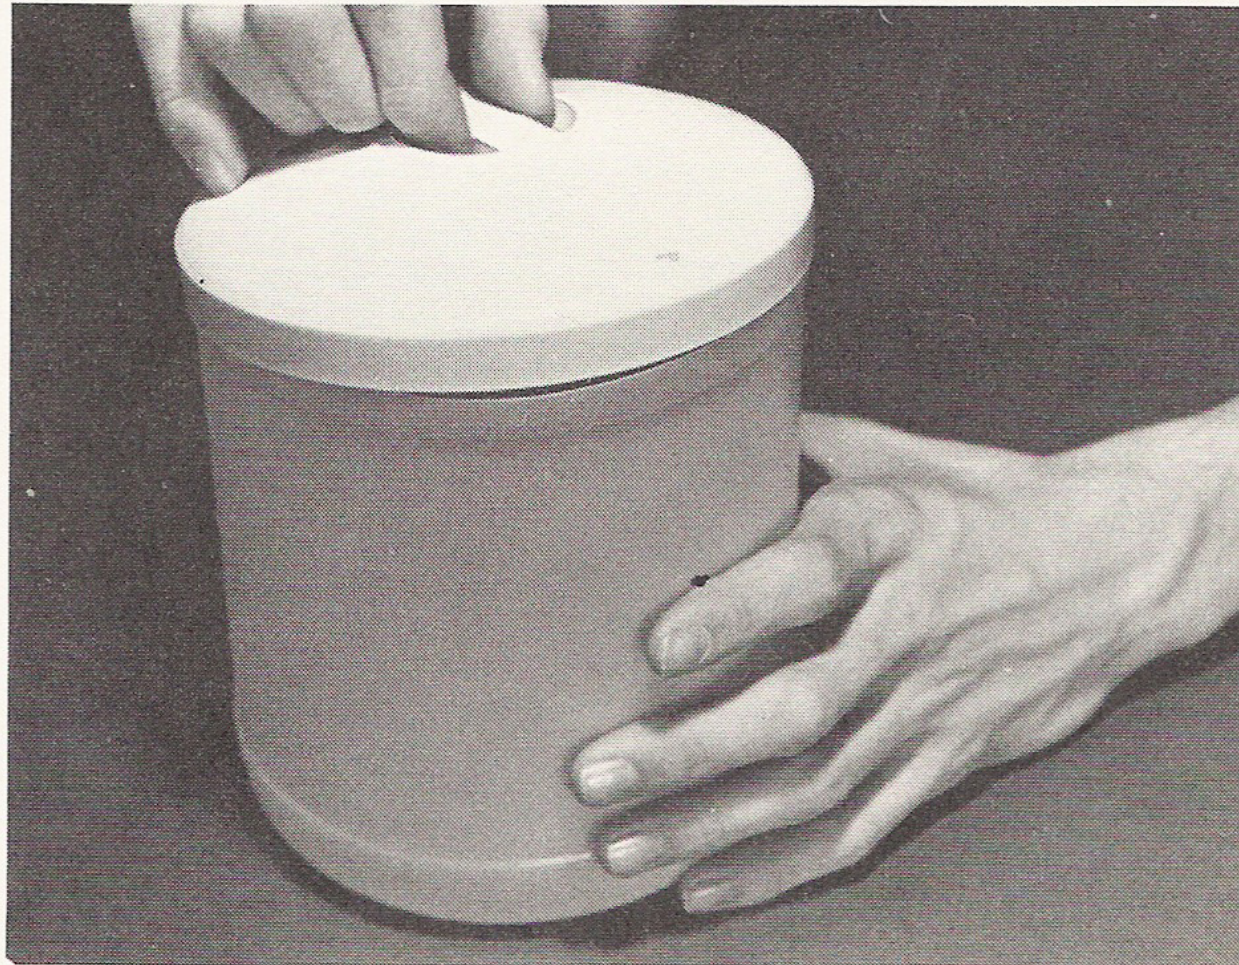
Checking the fit of the vacuum formed container lid.
